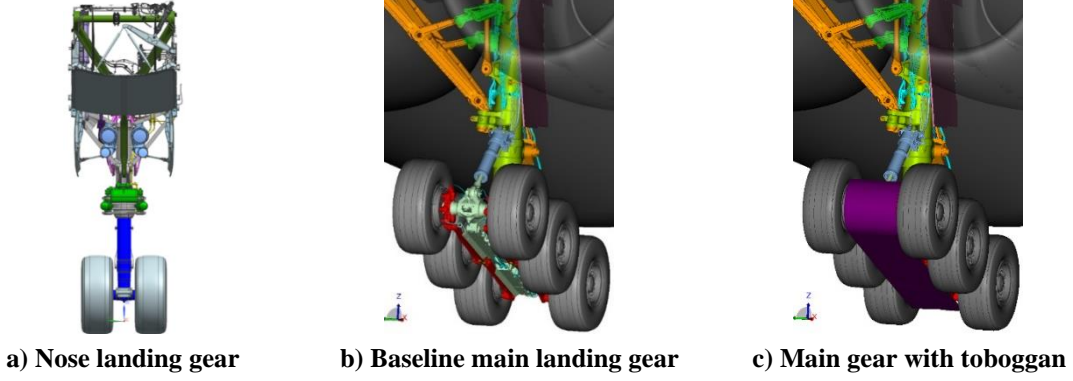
Close-up view of modeled full-scale B777-300ER landing gears.
